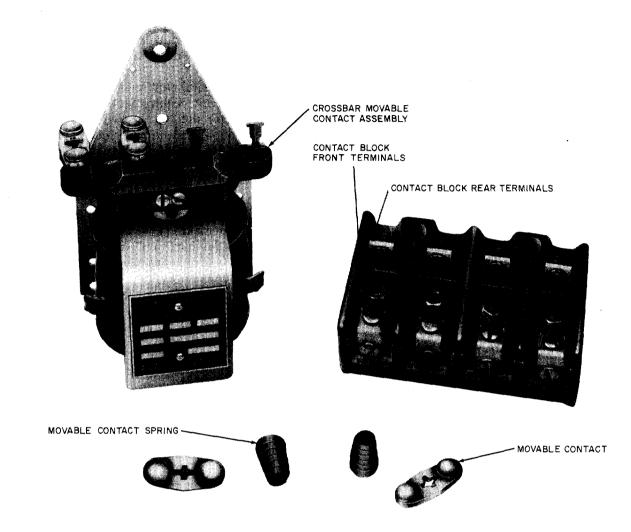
Typical Allen-Bradley Contactor (Bulletin 702 Shown)
